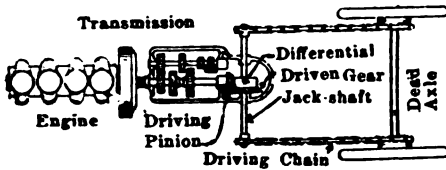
Double chain drive type of transmission. Transmission is mounted on frame and is connected by bevel gears to a jack shaft. This type used to a great extent on trucks. Transmission of the gear type.
